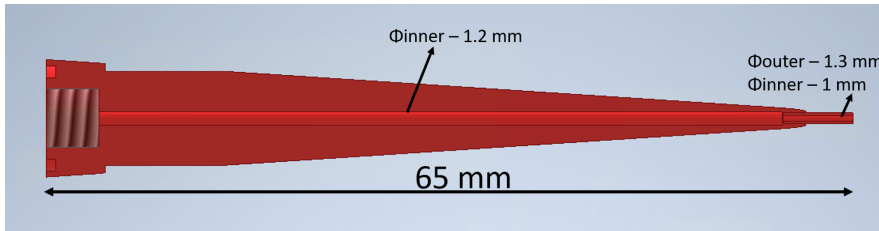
CAD drawing of the new modified needle assembly with its dimension.
